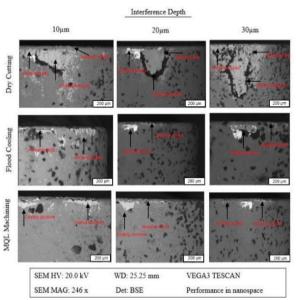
Wear land and mechanism of coated carbide tool after complementary machining.
